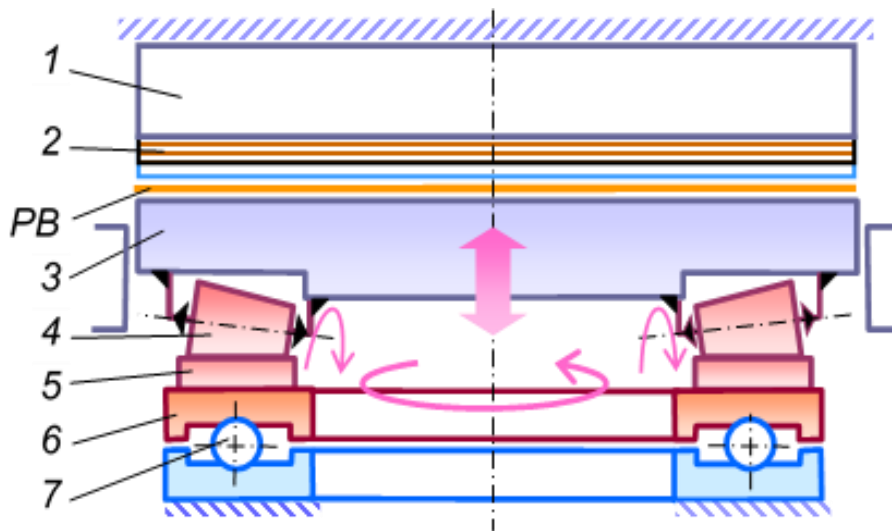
Scheme of die-cutting press with cam mechanism of pressure plate drive
